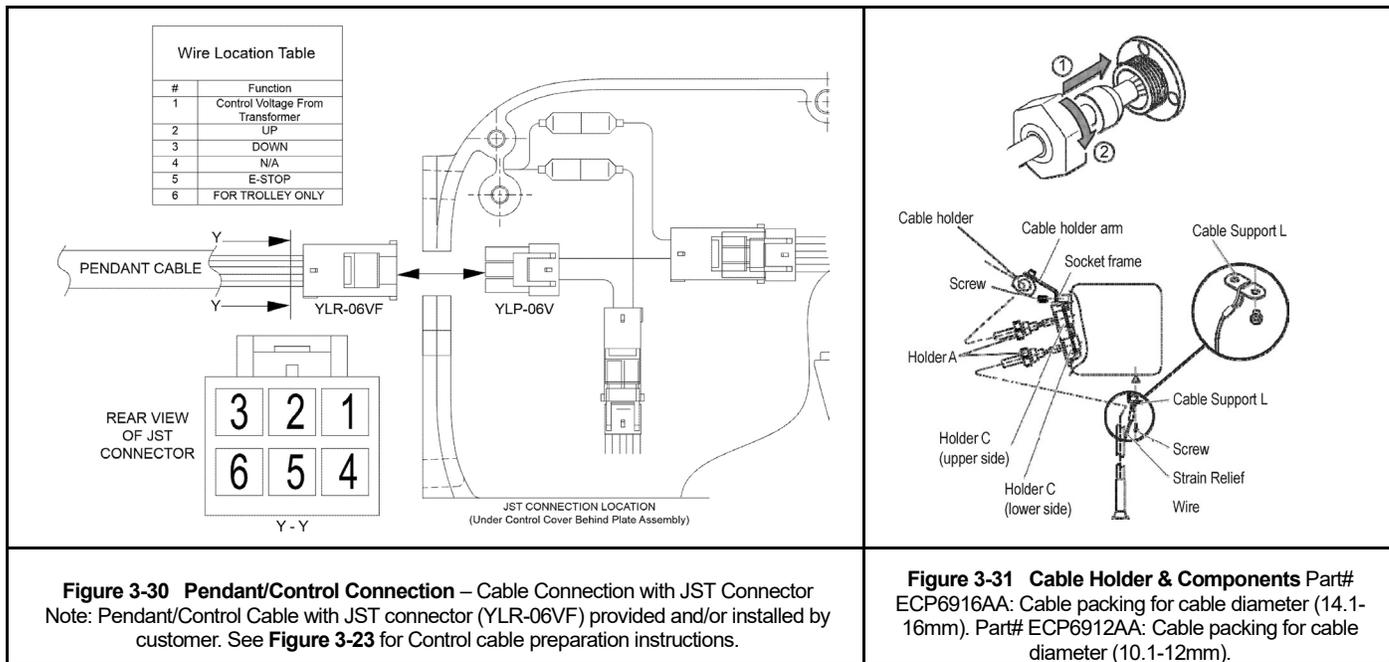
Pendant/Control Connection – Cable Connection with JST Connector
